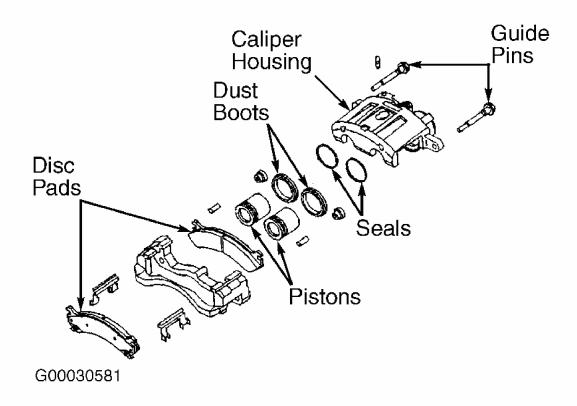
Exploded View Of Dual Piston Caliper Assembly (Typical) Courtesy of GENERAL MOTORS CORP.
